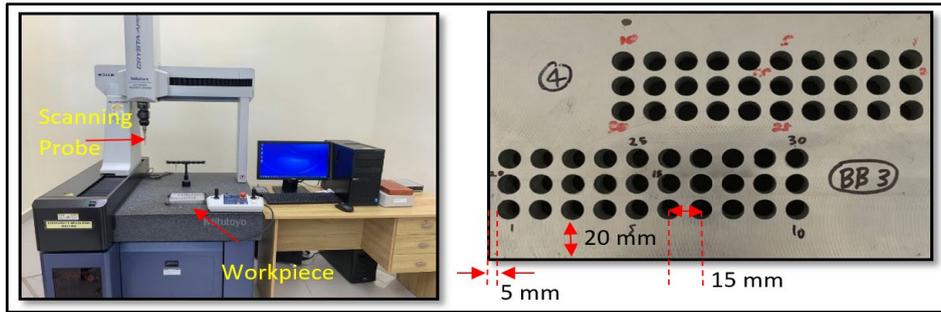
Measurement setup of Hole Circularity and Top view of the workpiece
